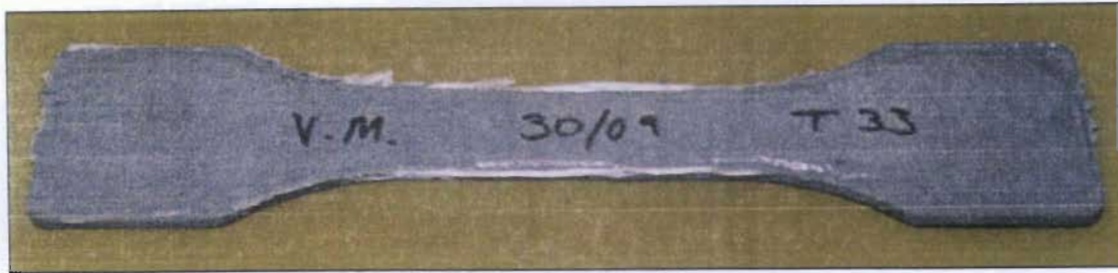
Tensile test specimen, made in steel split mould. (Top surface)
